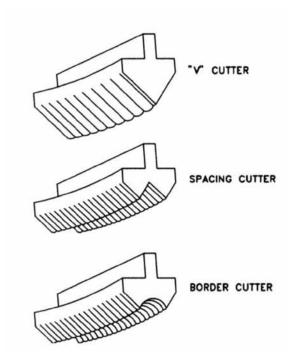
The 3 basic cutting tools you will need are (from top to bottom) "V" cutter, a spacing cutter, and a border tool.
